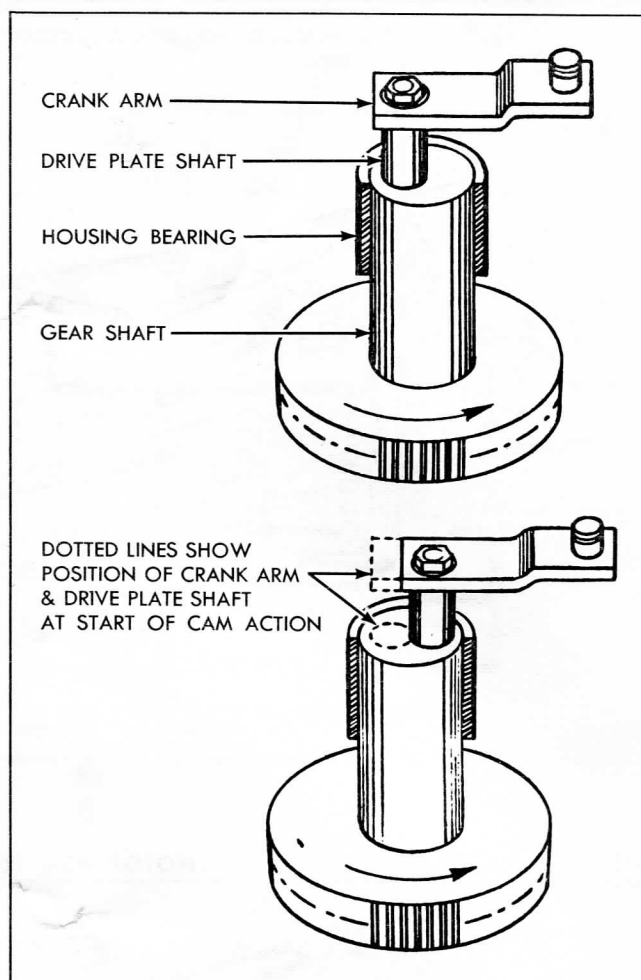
Crank Arm and Drive Shaft Showing Cam Action—Pontiac and Optional Tempest
